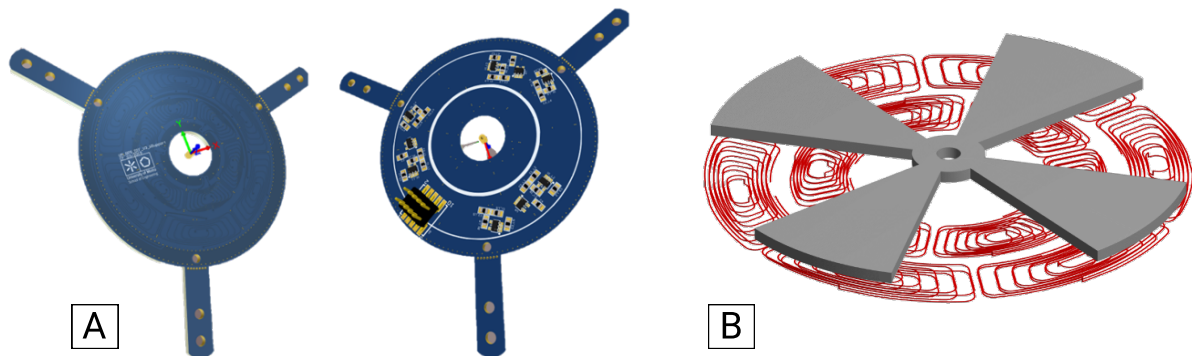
Differential Coils APS: A: PCB sensor; B: Coils and target geometry.
